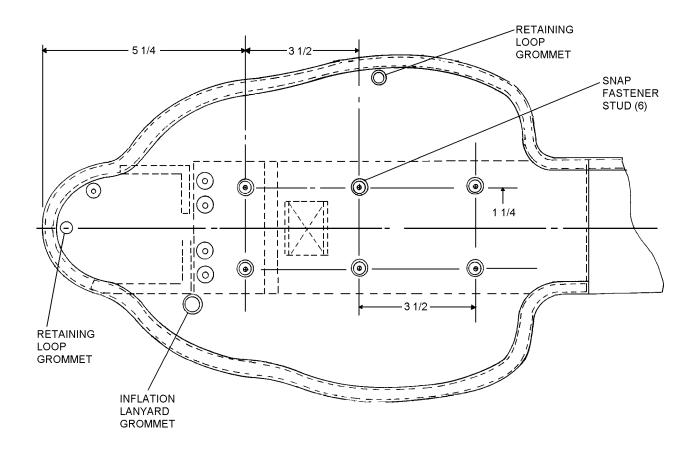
Installation Casing Attachment Patch Snap Fastener Studs
